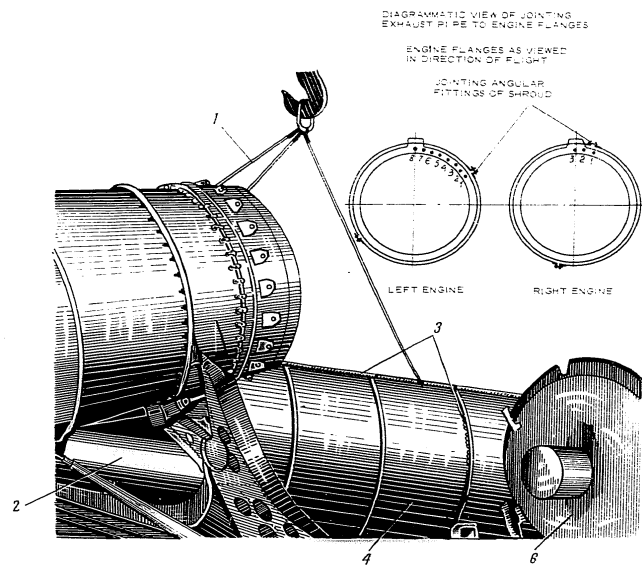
ATTACHMENT OF J-25H ENGINE EXHAUST PIPE
